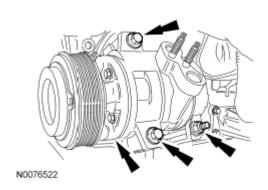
Locating Stud Bolt, A/C Compressor And Bolts Courtesy of FORD MOTOR CO.
